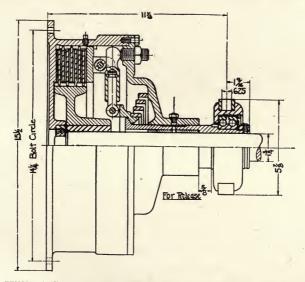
Hilliard Clutch with Double Annular Ball Bearing and Enclosed Spring.
